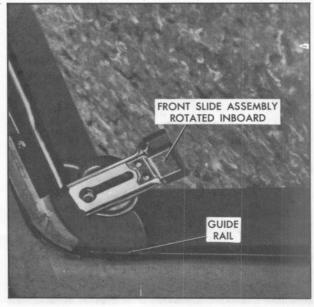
Front Slide Assembly Clear Of Guide Rail
